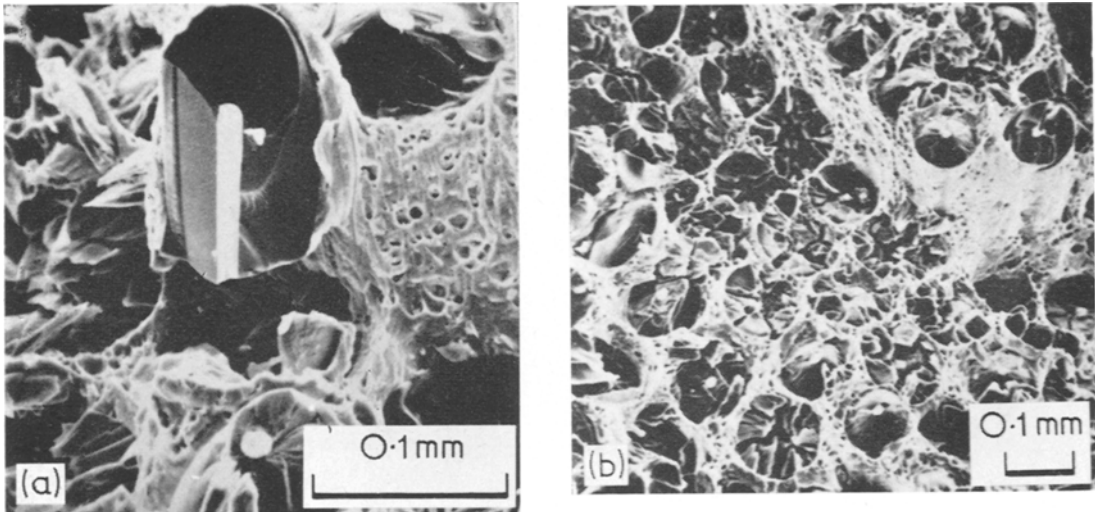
Longitudinal impact fracture surfaces. (a) as-received B-Al, (b) H/t B-Al.
